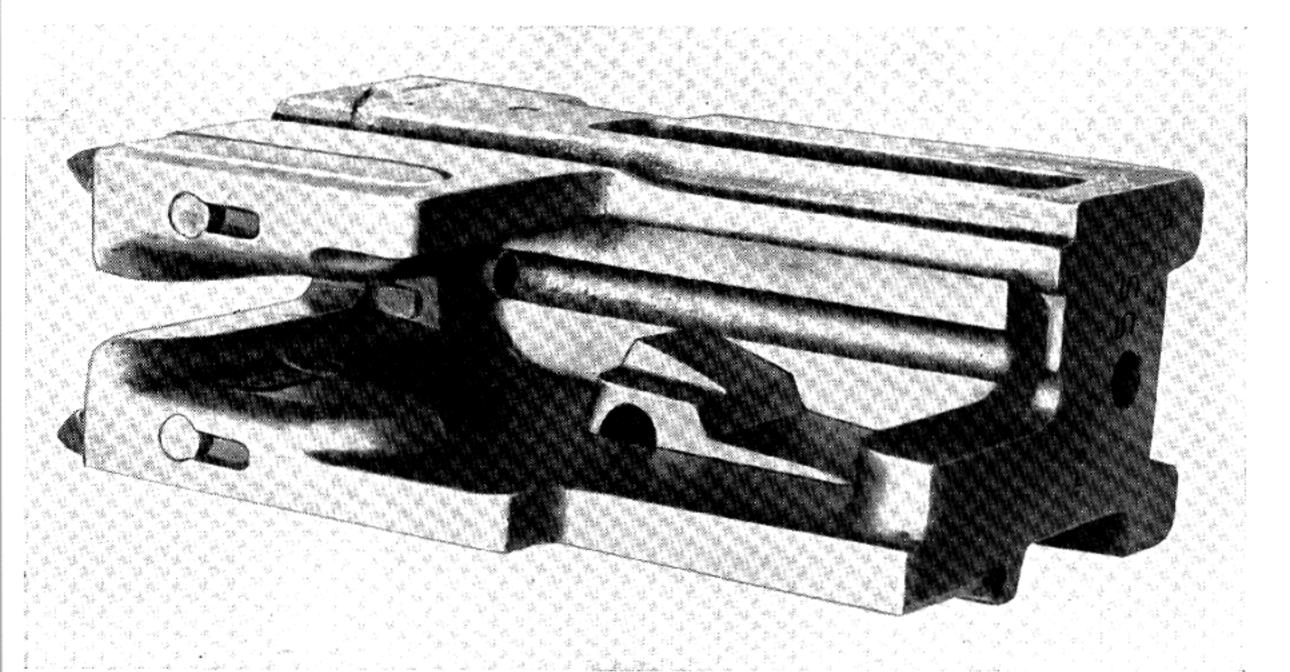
Top rear view of VYa bolt, showing "pincers" which extract round from belt and position it in T-slot for feed cam.
